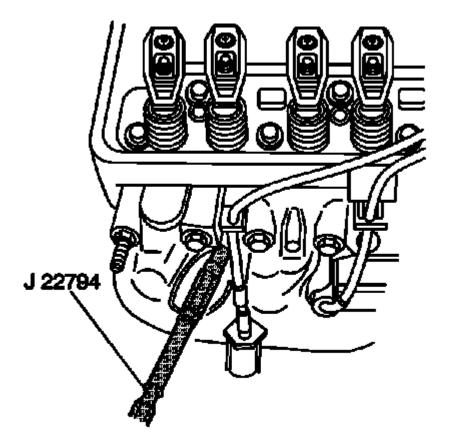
View Of J 22794 Installed Into Spark Plug Hole Courtesy of GENERAL MOTORS CORP.
